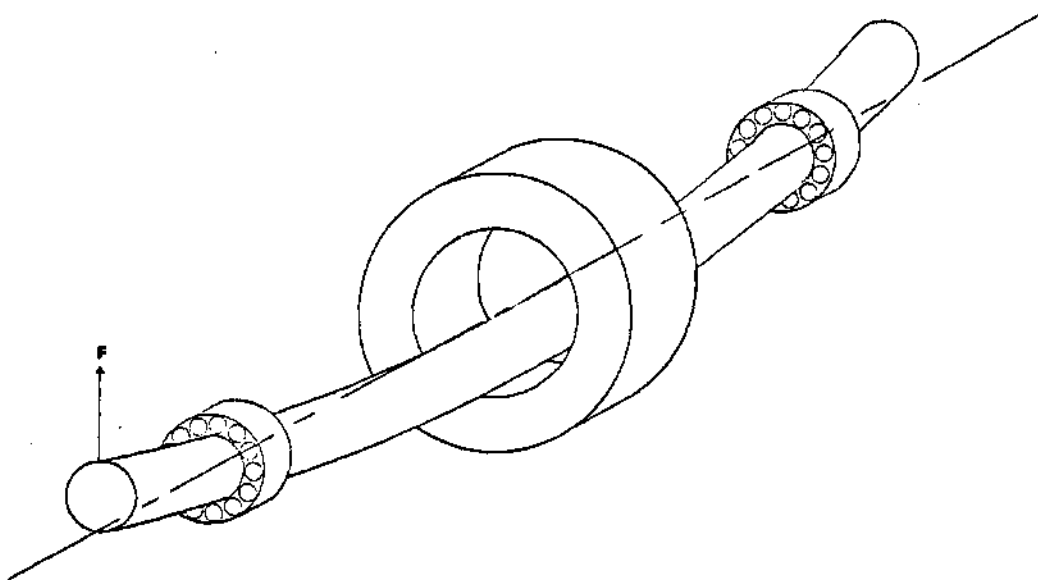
Position of Shaft Relative to Journal Bearing in Three-Support Design
